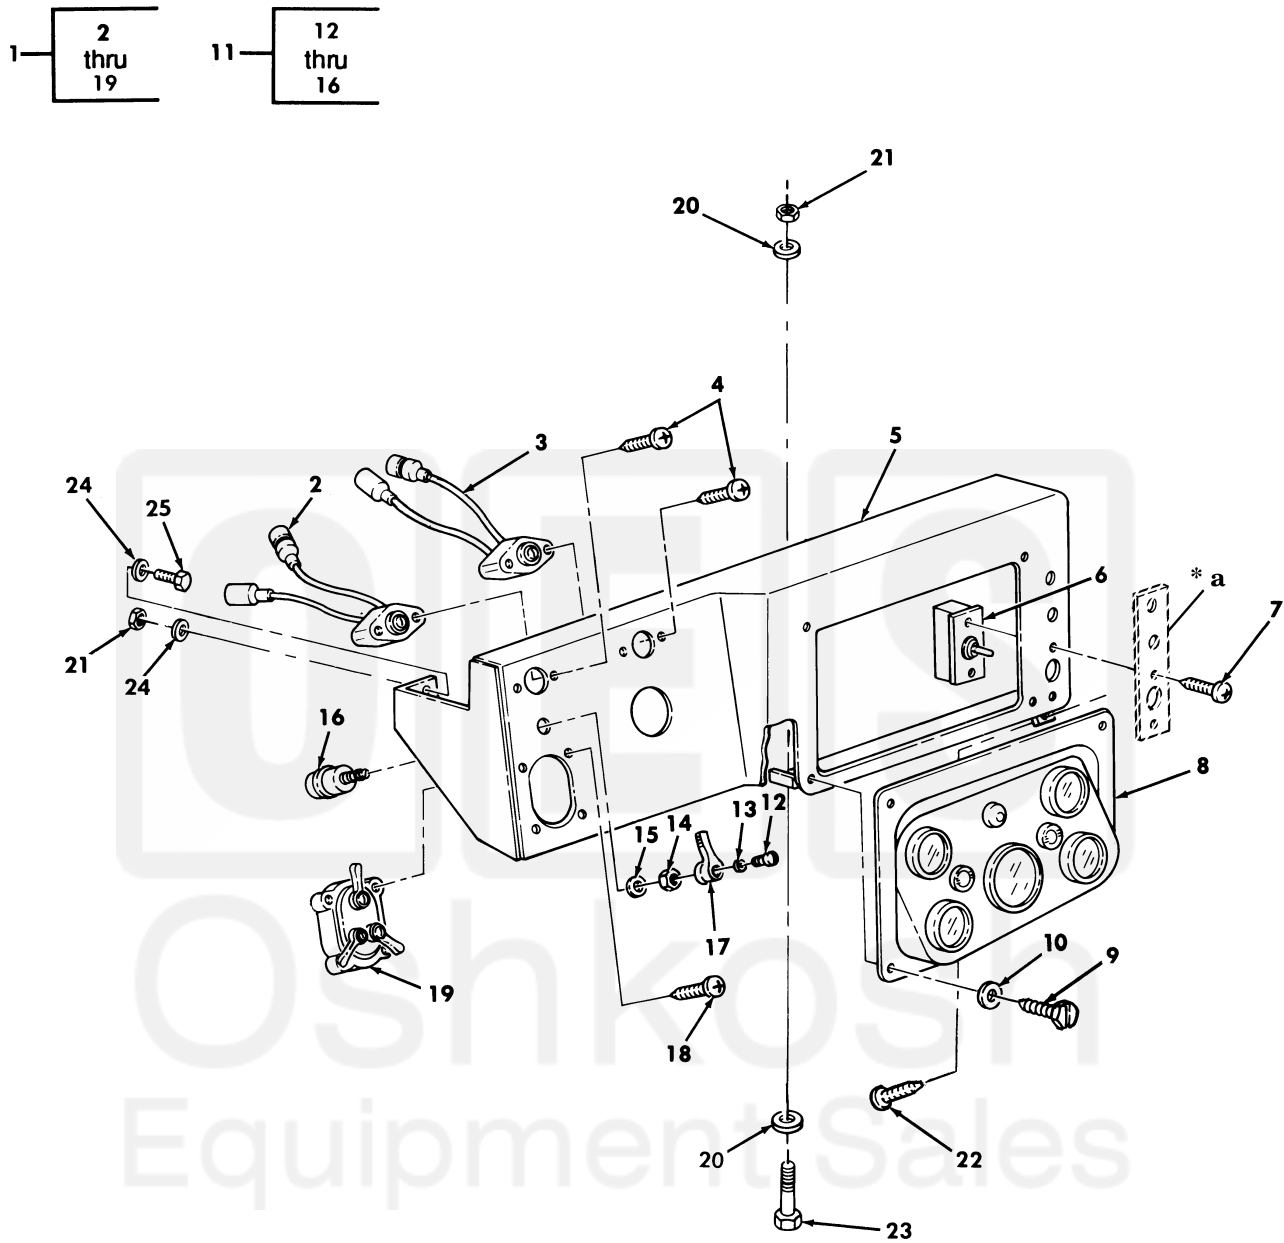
Instrument Panel Assembly and Mounting Hardware.
